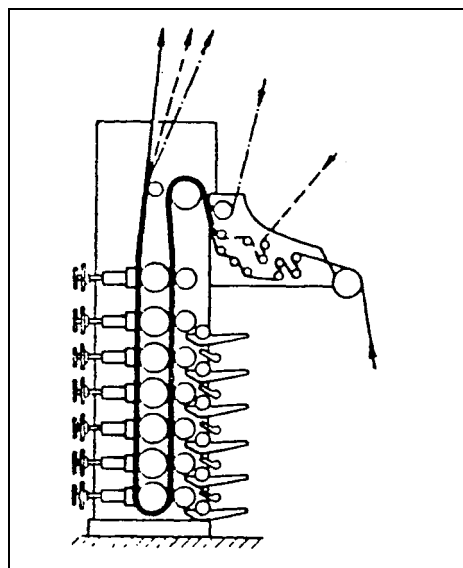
More recent example of roller printing machine [7, UBA, 1994]
